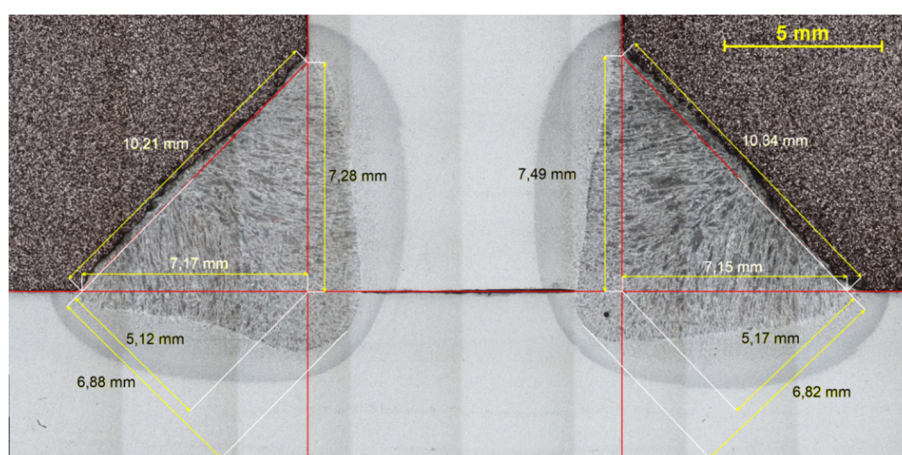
Metallographic sample of Weld Q14 ($Q = 14 \text{ kJ}\cdot\text{cm}^{-1}$)—1st bead (right) and 2nd bead (left).
